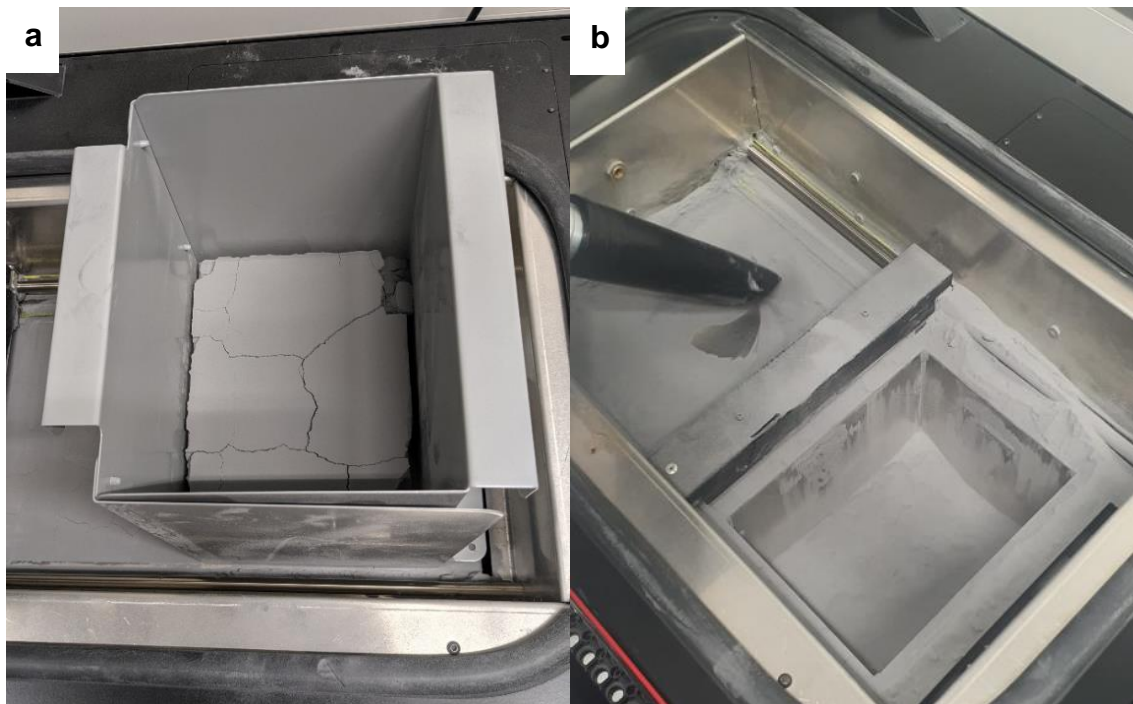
Part cake removal using part carriage plates (a) and build chamber cleaning using ATEX vacuum cleaner (b)
